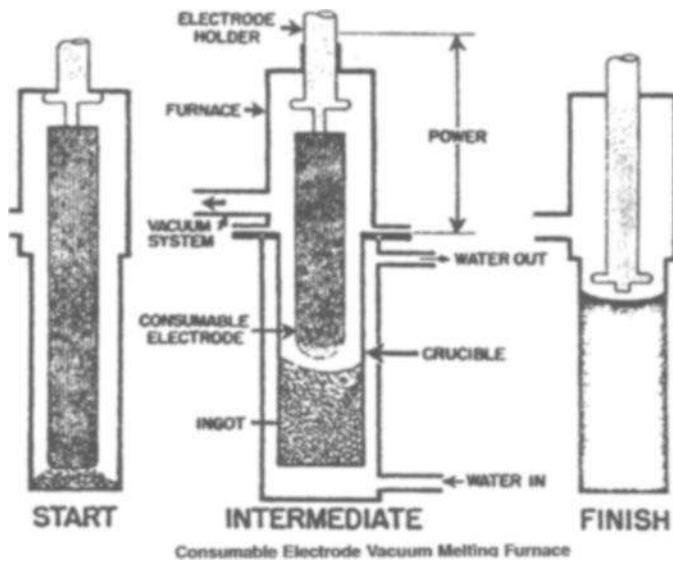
Schematic of the operation of a vacuum arc remelting furnace from ASTM A 604, Standard Test Method for Macroetch Testing of Consumable Electrode Remelted Steel Bars and Billets.
